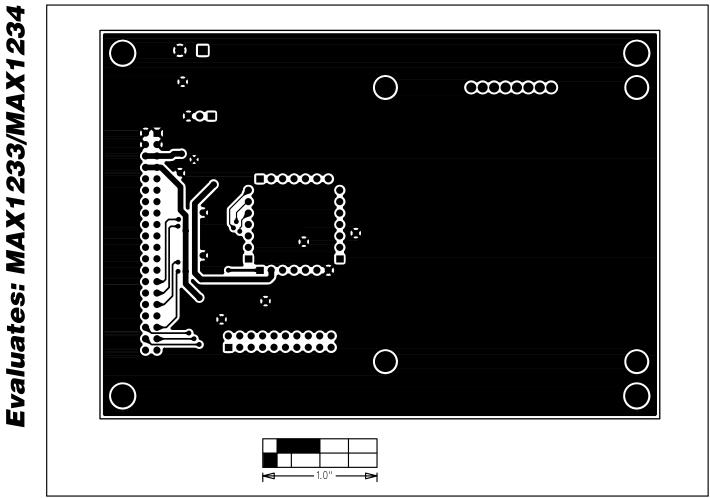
MAX1234 EV Kit PC Board Layout—Solder Side
